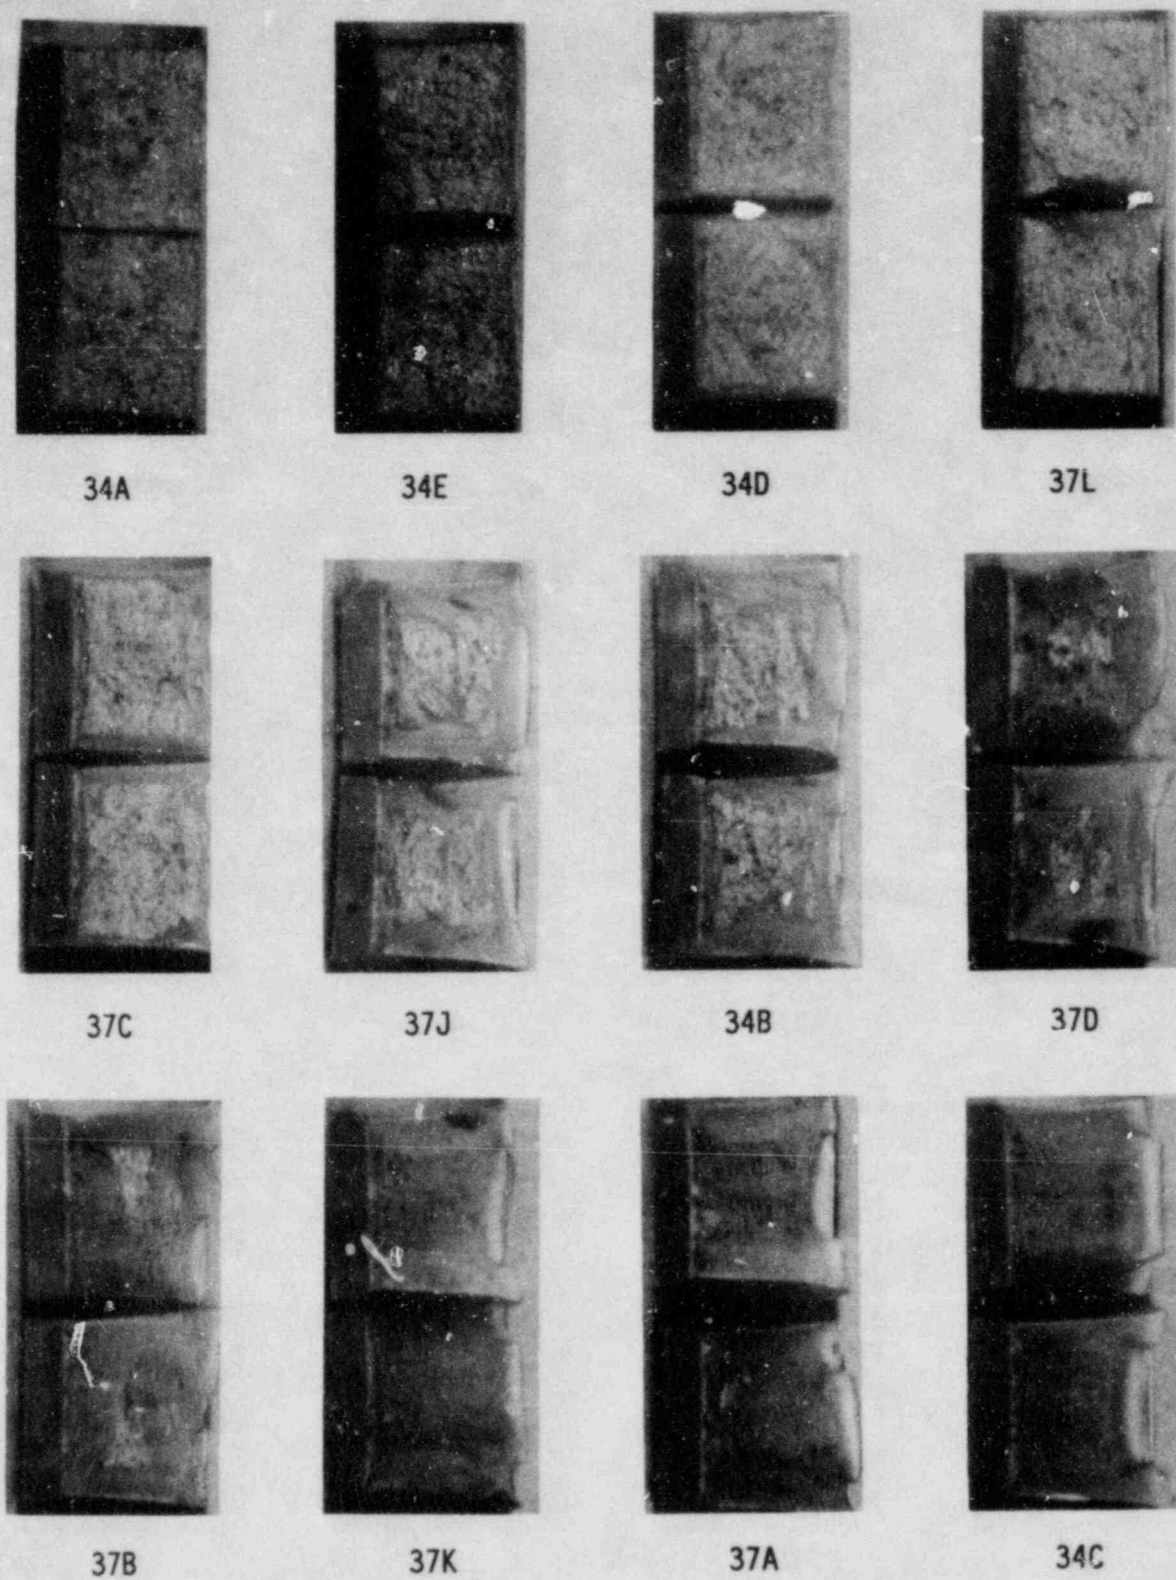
Irradiated Capsule (W-290) Charpy Impact Specimen Fracture Surfaces for Palisades Weld Metal
